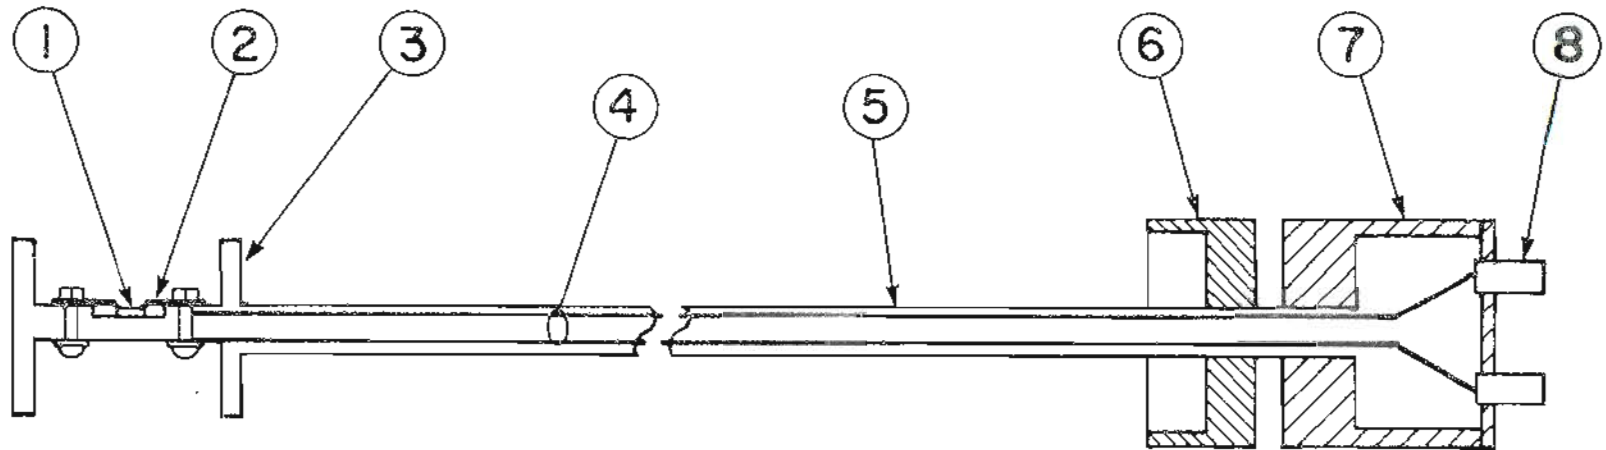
SAMPLE HOLDER ASSEMBLY FOR MODERATE TEMPERATURE
